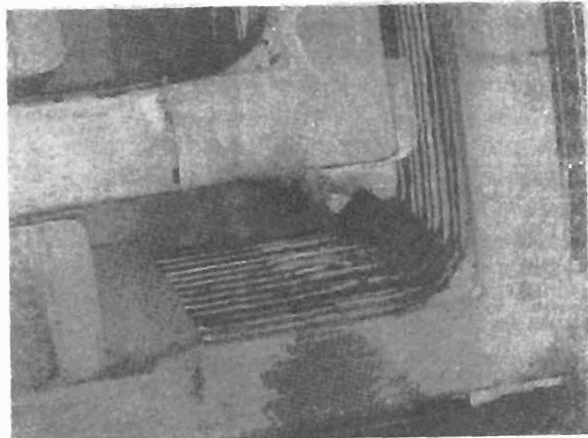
STG #40 Generator Rotor winding close up of black deposits on the soldered connection, as opened.
